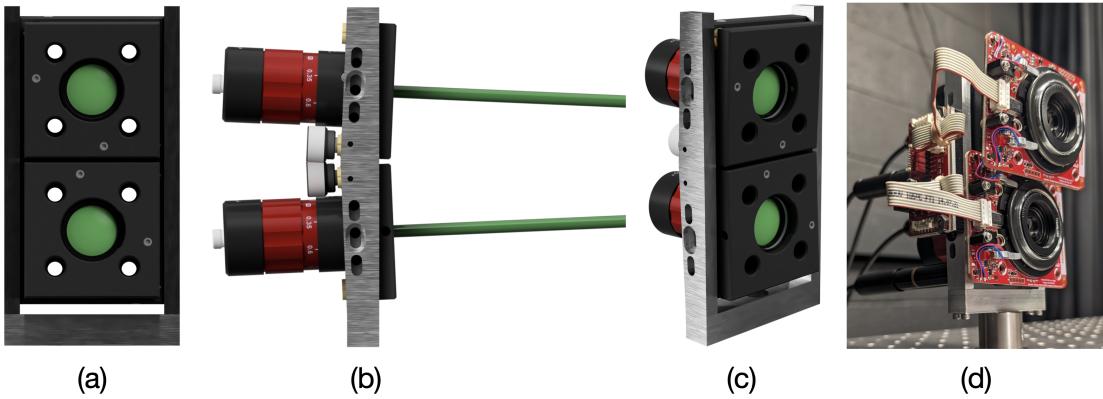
(a) CAD front view of collimator mount; (b) CAD side view showing the relative orientations of illumination beams; (c) CAD perspective view; (d) Fully assembled collimator mount which controls vertical and angular illuminator separation. Beam diameter is also controlled using motorized iris diaphragms.
